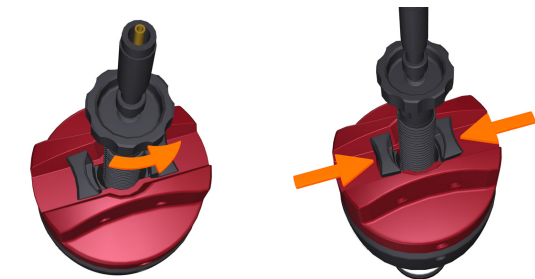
Adjusting the adapter position using QuickLock, steps 4–5.
